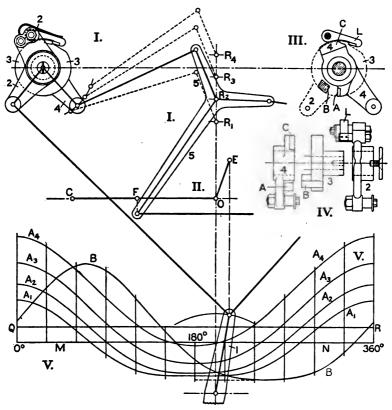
Steam-valve Gear of the Holly Pumping-engine, Figs. 227, 269.
